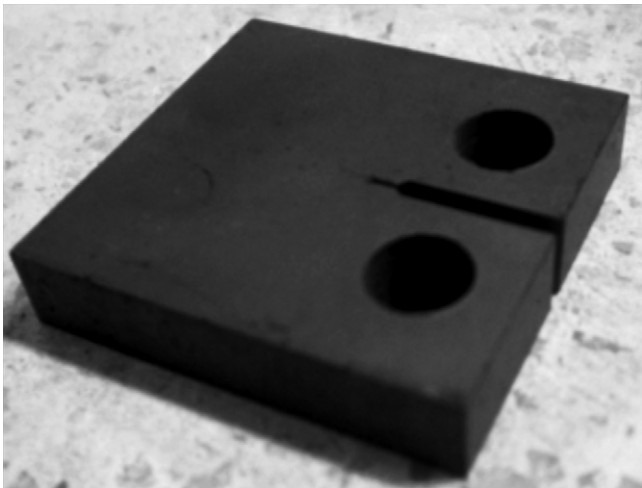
Test specimen for fatigue crack propagation.
